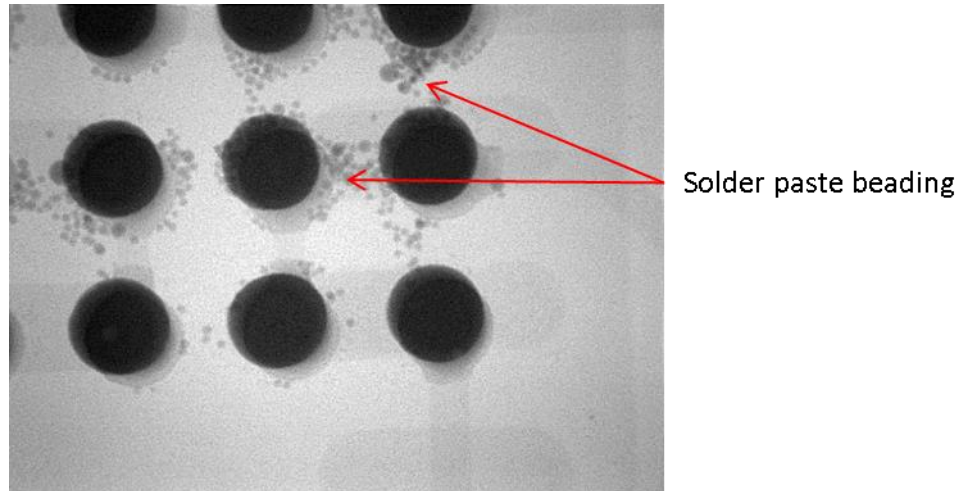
Solder paste beading after reflow of an assembly with thick collar
